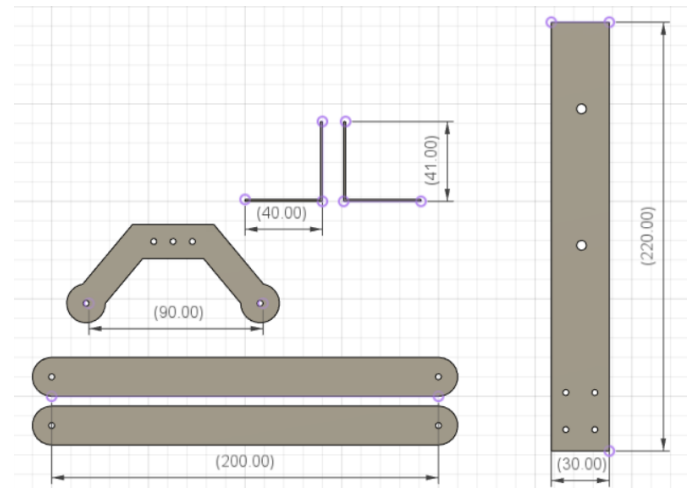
Design of disassembled arm in Fusion 360 (all dimensions are in mm).
